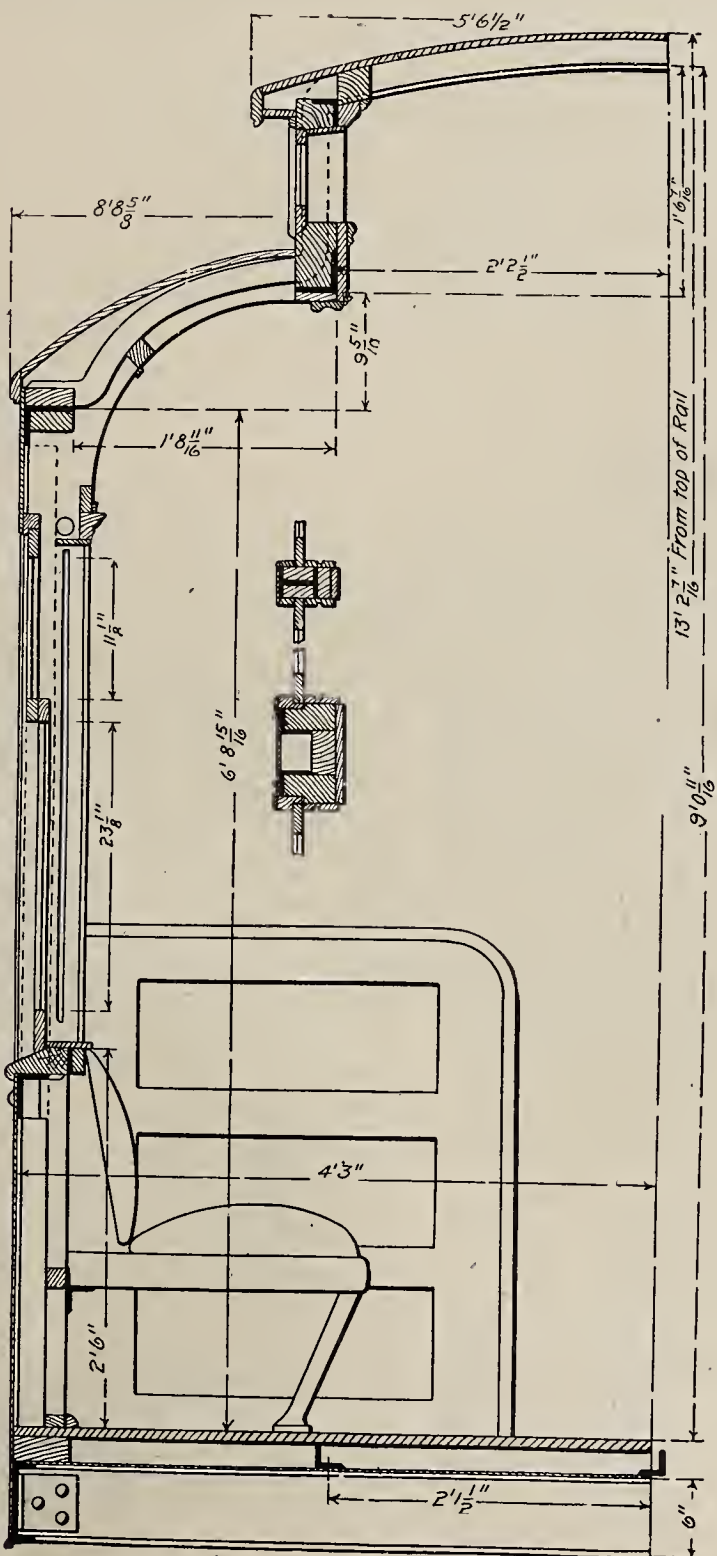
CROSS-SECTION OF STEEL CARS, METROPOLITAN WEST SIDE ELEVATED RAILROAD, CHICAGO.
